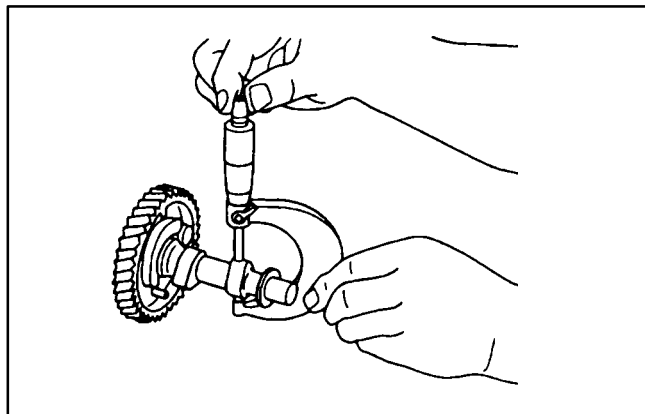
INTAKE AND EXHAUST CAM HEIGHTS
